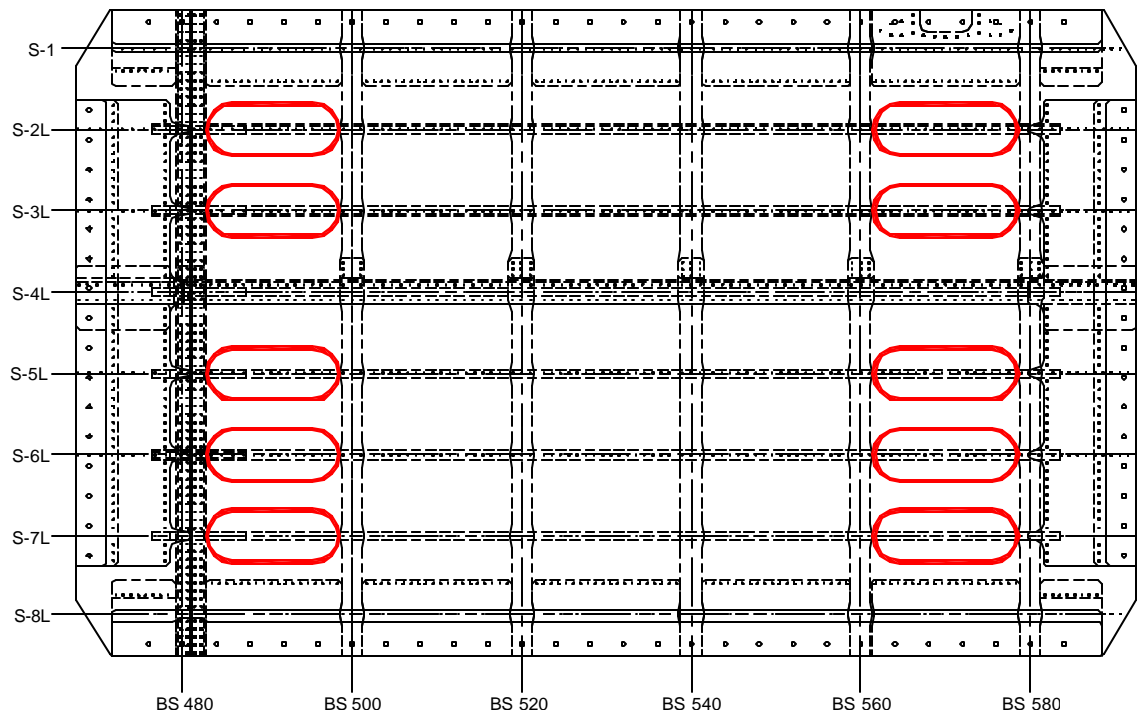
34: Fastener Hole Rework Locations to Prevent Skin Cracking
